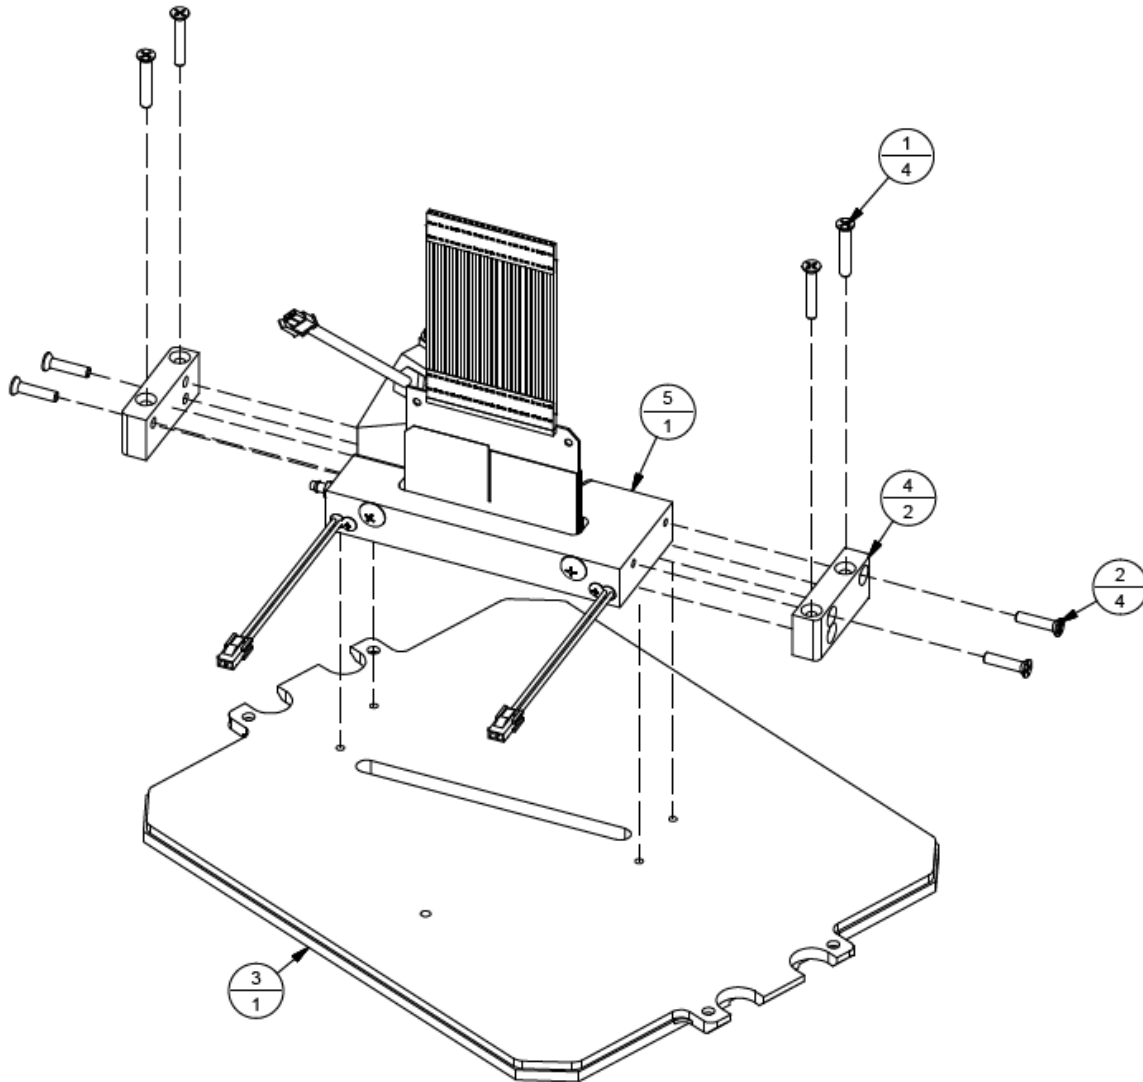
9107441A – Bottom Plate Assembly, Atom 1025
